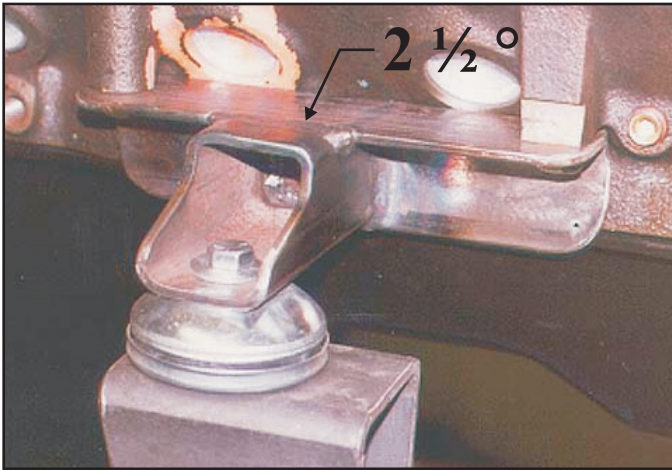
Custom "one-off" motor mount. Note that the tube steel piece is welded at a 2 1/2 degree angle with respect to the angle steel. This lets the motor sit at the proper angle for drive train phasing, with the carburetor flange level to the ground.
